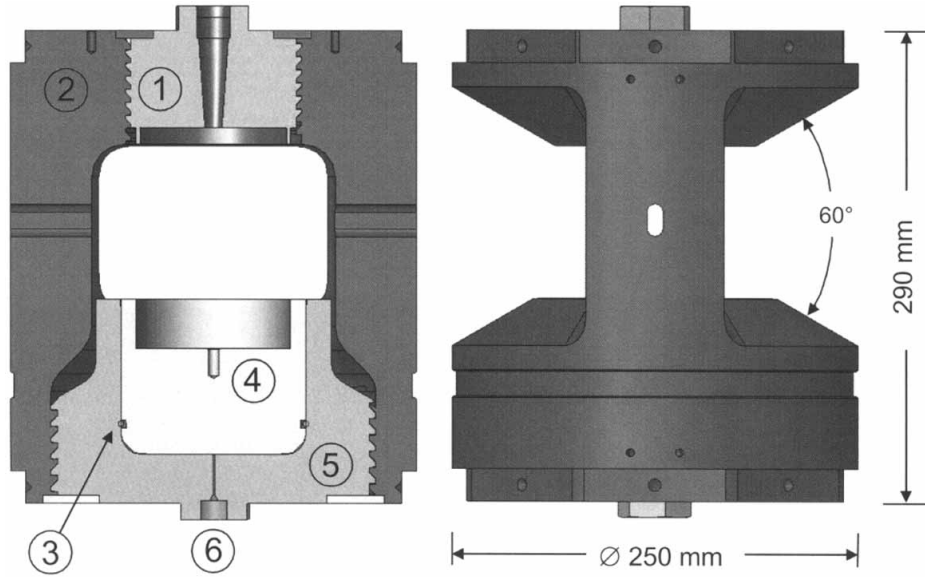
Cross-section (left) and side view (right) of the VX variant of the PEC. (1) breech, (2) body, (3) O-ring, (4) piston, (5) cylinder, (6) hydraulic oil inlet (after Klotz *et al.* [21]).
